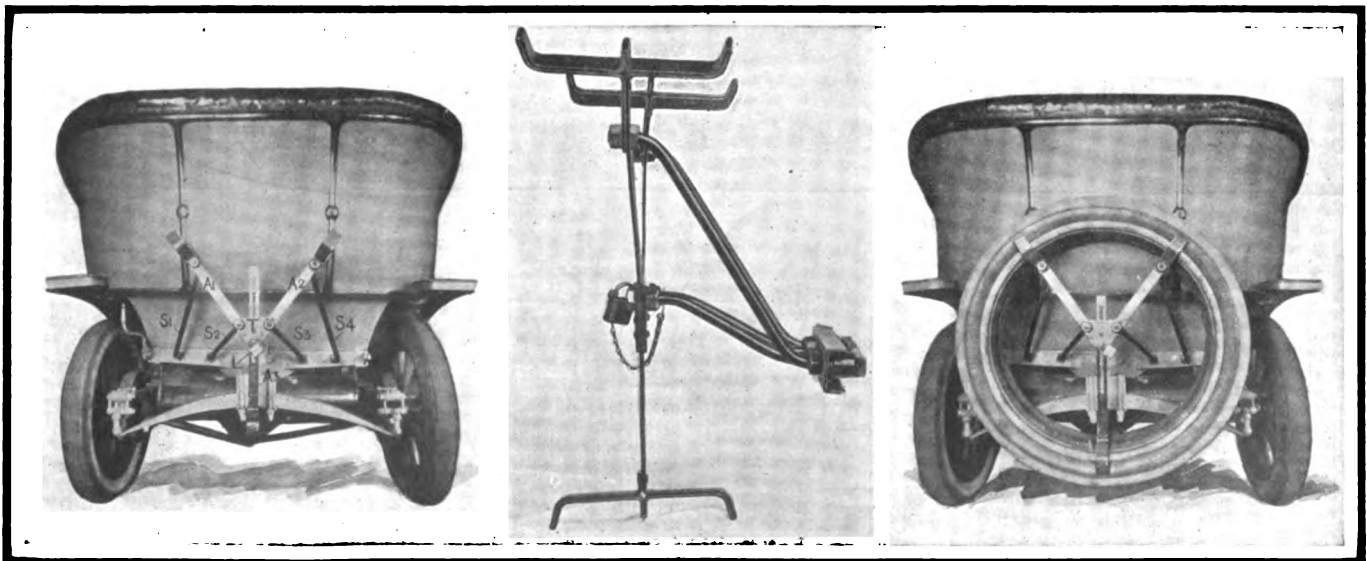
Detail of Glover rear tire holder. Fig. 7—Side view, showing method of attaching. Fig. 8—Holder in place
